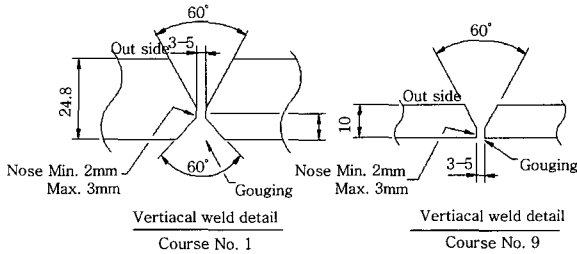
Weld joint shape for vertical weld of inner tank wall⁷⁾
